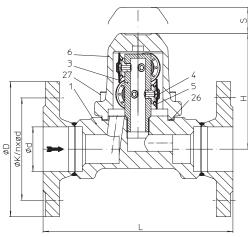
1....6K2 (NPS 1 1/2" - 2") with 6 capsules, with flanges
